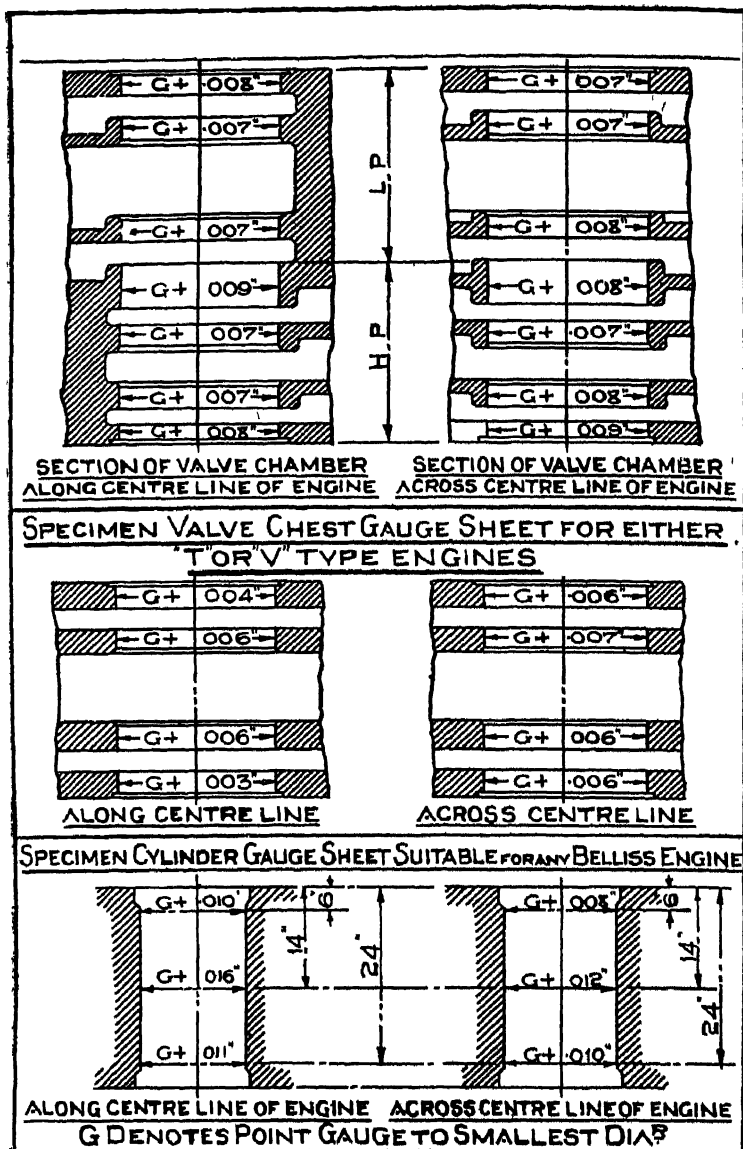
SPECIMEN GAUGE SHEET FOR BELLISS ENGINES
